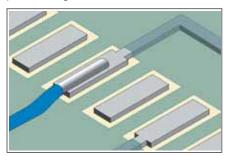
Acceptable* Wire soldered parallel to conductor, contact, SMT pad.
